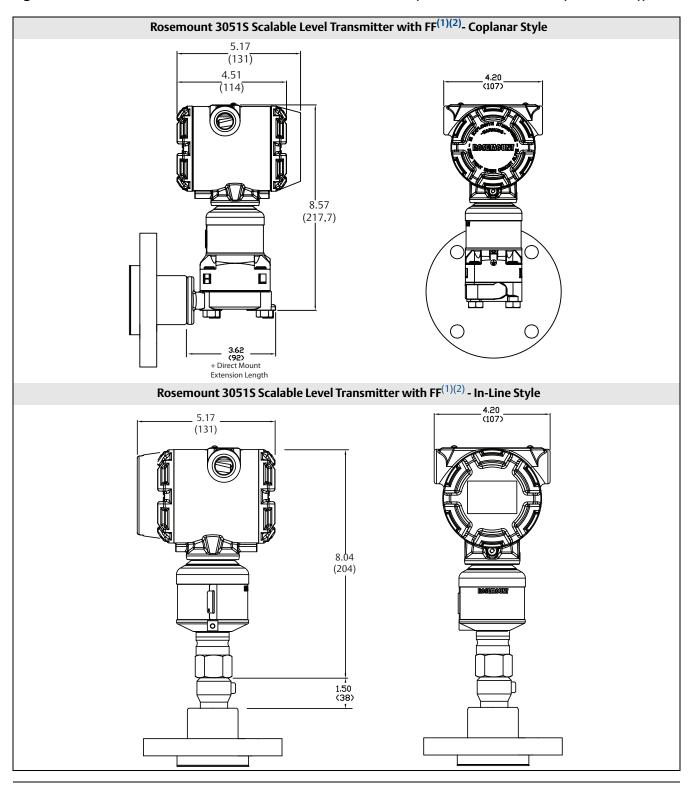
Rosemount 3051S Scalable Level Transmitter with FF Seal (Measurement in inches (millimeters))
